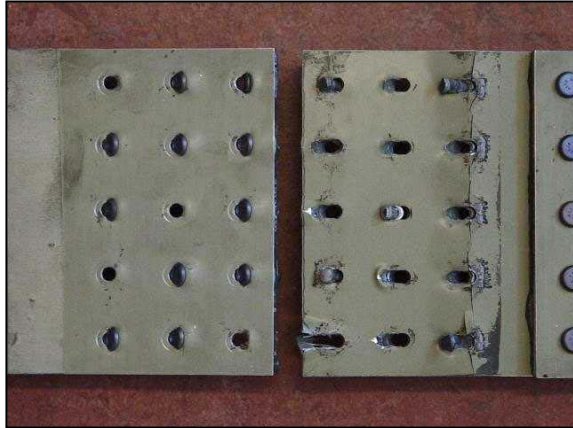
View on specimen 2-B-88 after failure, skin sheet (left) and butt strap mating layer (right)
